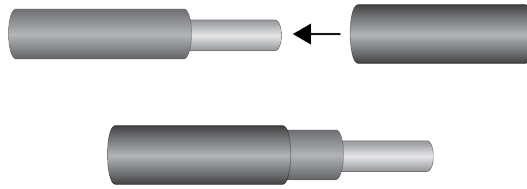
Sliding a Heat-shrink Tube Over the Grounding Wire
